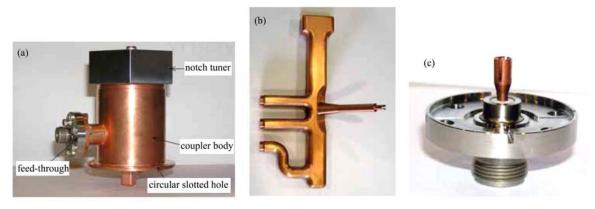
A PEFP prototype HOM coupler. (a) the prototype HOM coupler; (b) the inner conductor and feed-through; (c) the vacuum feed-through.
